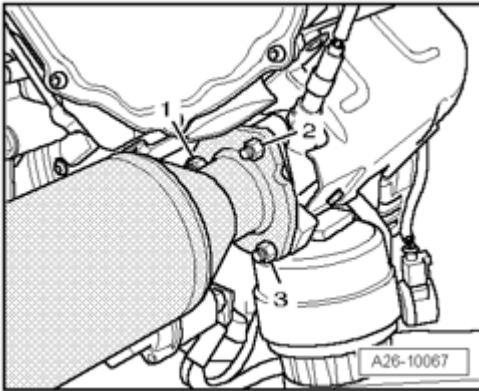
Removing Nuts & Right Front Exhaust Pipe With Catalytic Converter
